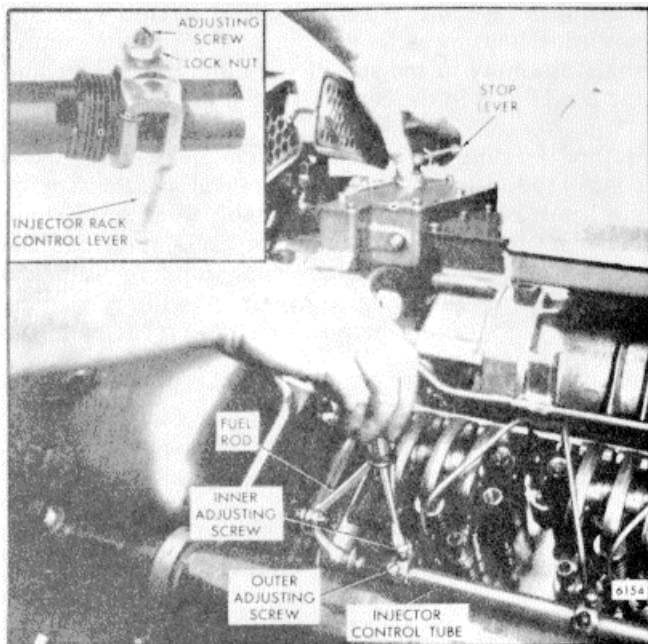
Positioning No. 4R Injector Rack Control Lever
